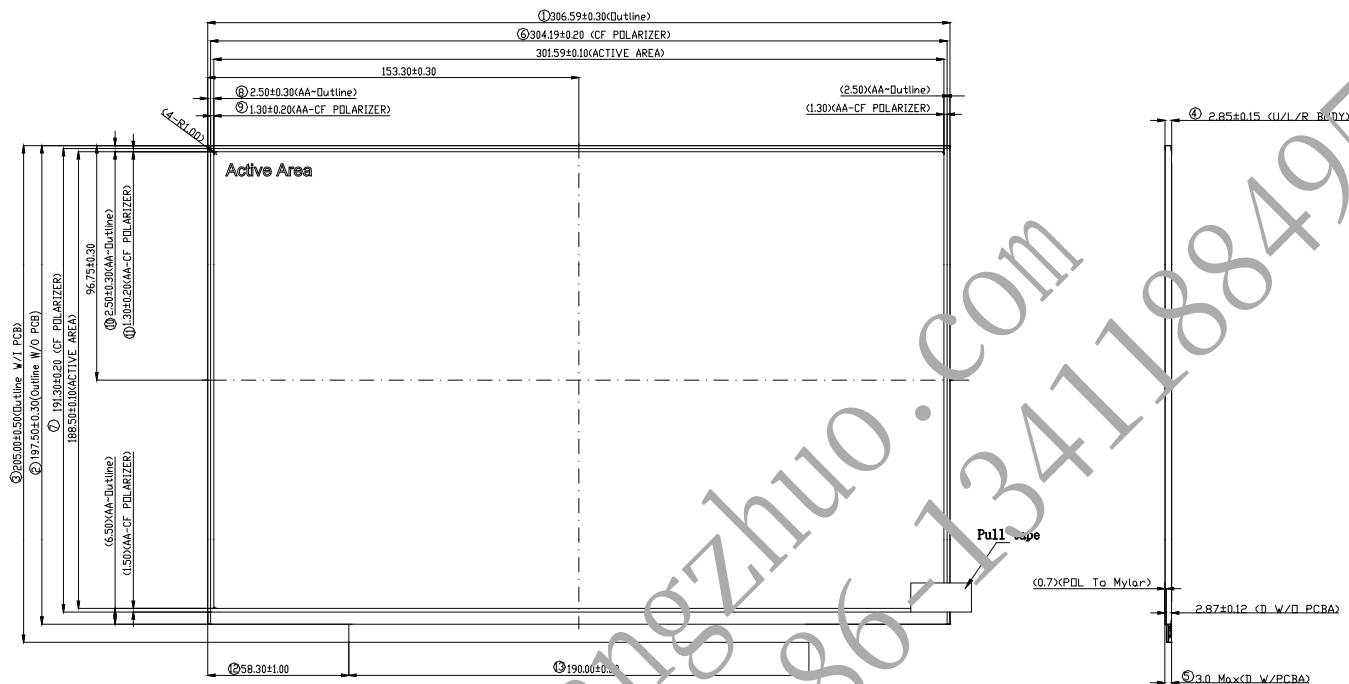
TTT-LCD Module Outline Dimension (Front View)
